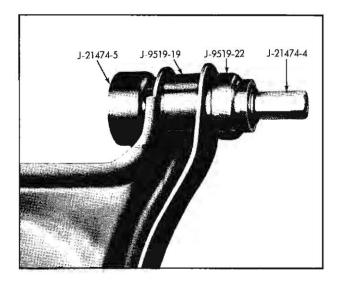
Installing Rear Bushing in Front Lower Control Arm
